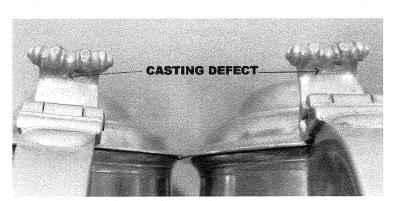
Casting defect shown in thumbpiece of both tankards in Fig. 7.
